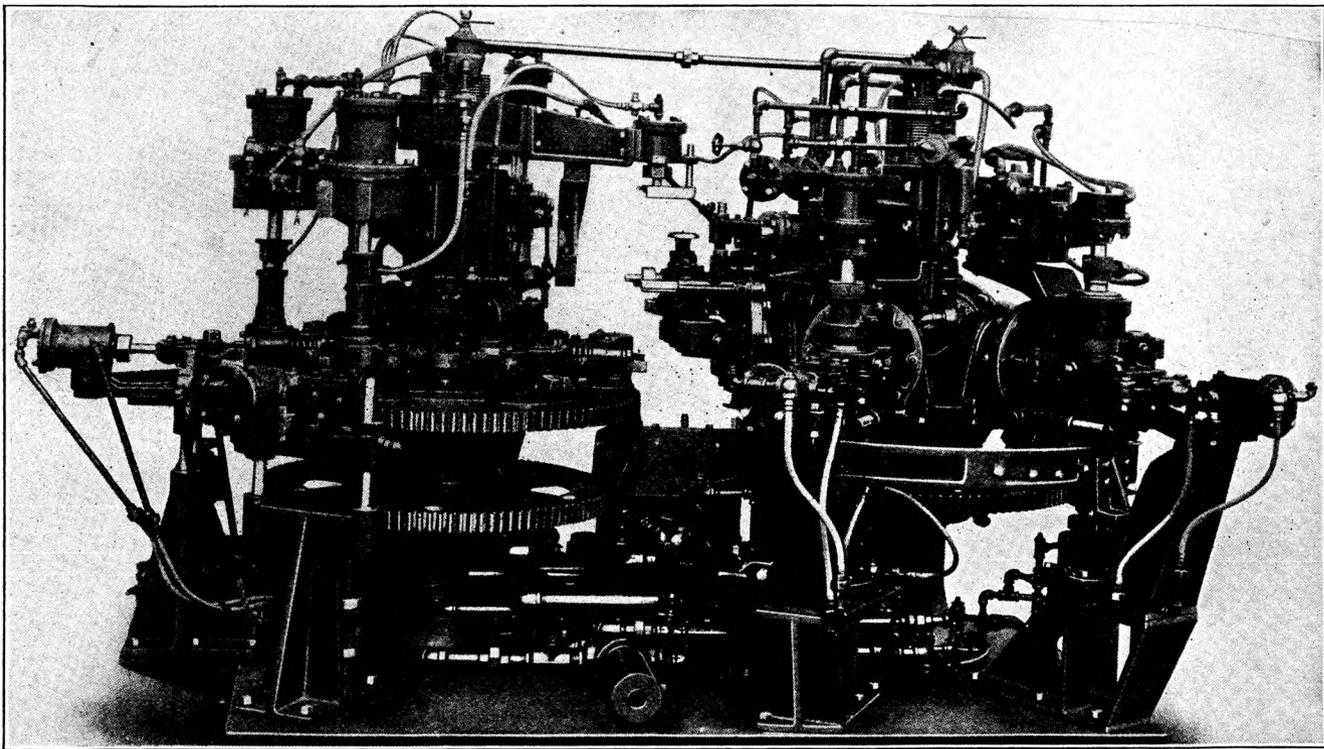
O'NEILL AUTOMATIC BOTTLE-MAKING MACHINE
